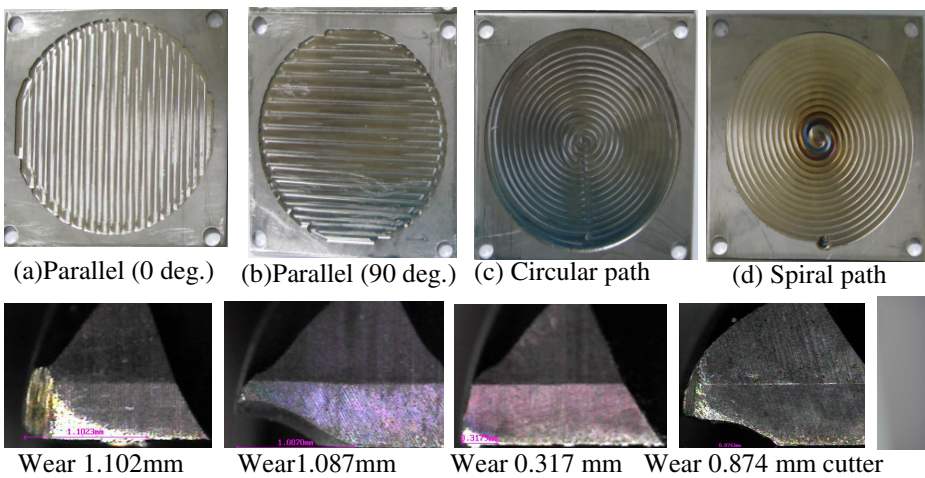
Cutting results of 4 tool path designs (top) and wearing of tools (bottom)
